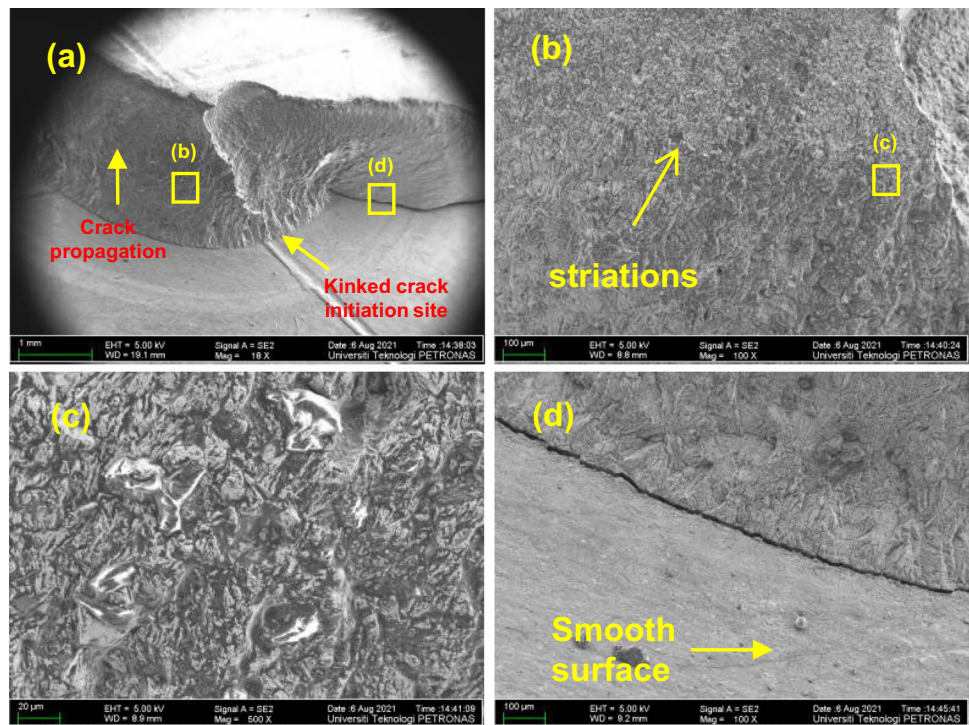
Fracture morphology of the double pulse weld failed via Type-2 mode a overall view, b at the middle of nugget, c higher magnification image at the middle of nugget, and d at bottom of nugget
